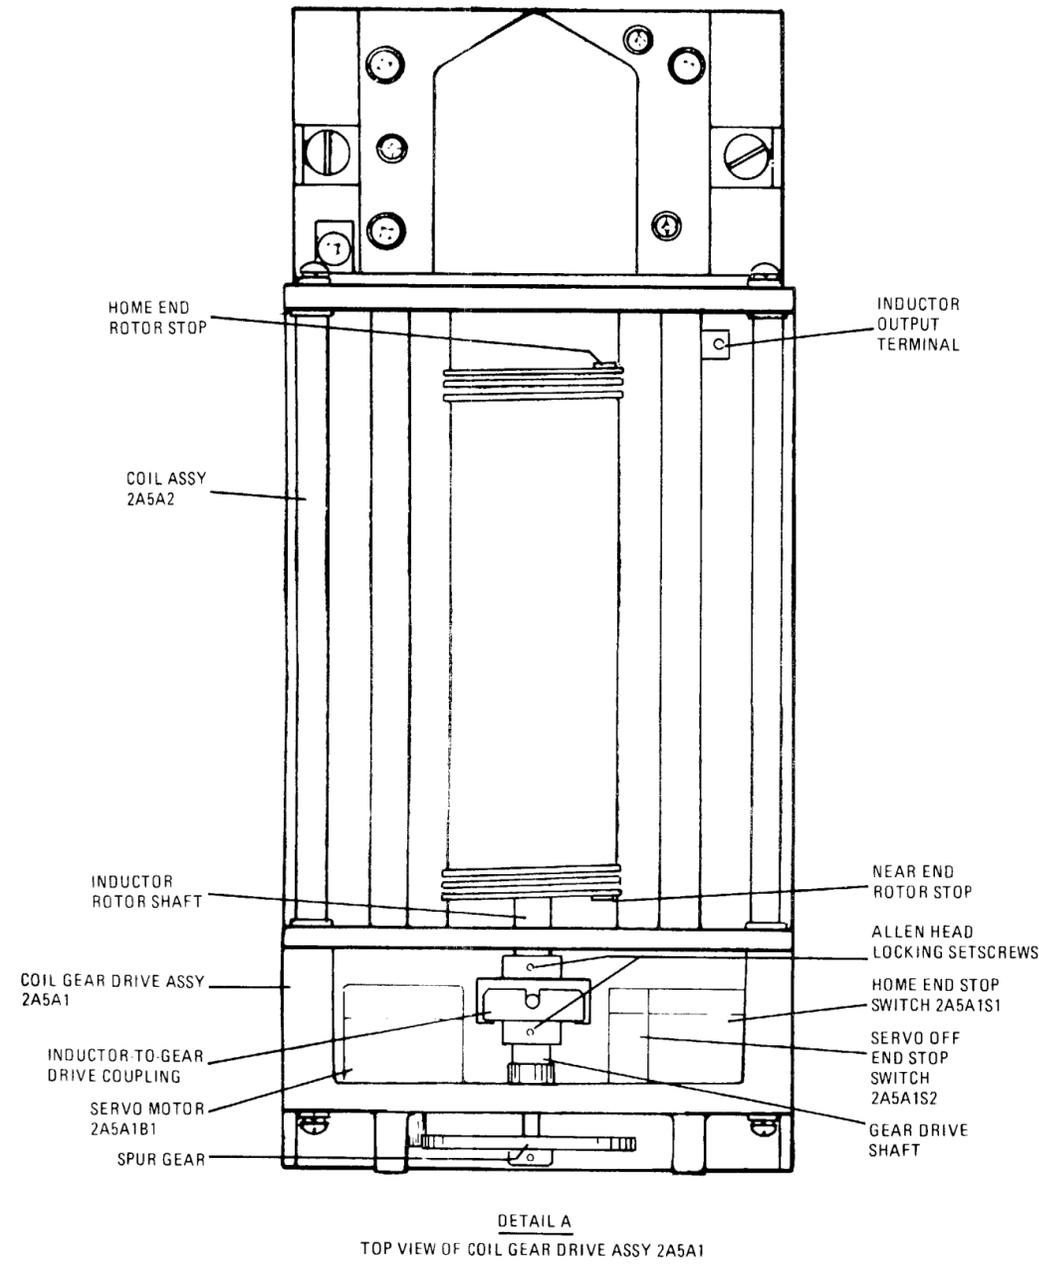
Inductive RF Tuner Assembly 2A5 - Adjustment Detail Views
